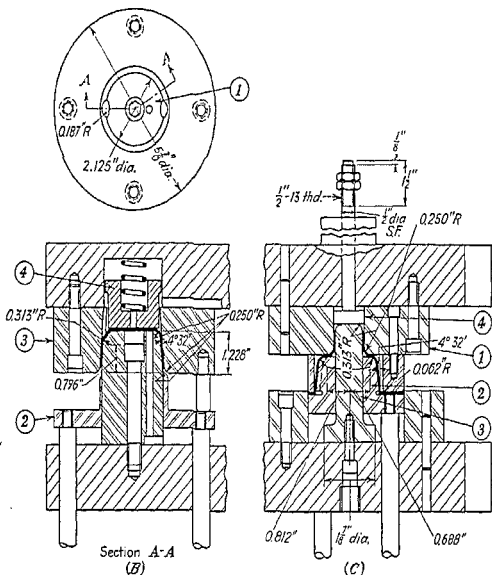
B and C. (B) Third-operation draw die, and (C) seventh-operation trim and redraw die for the part in Fig. 11-12A.
